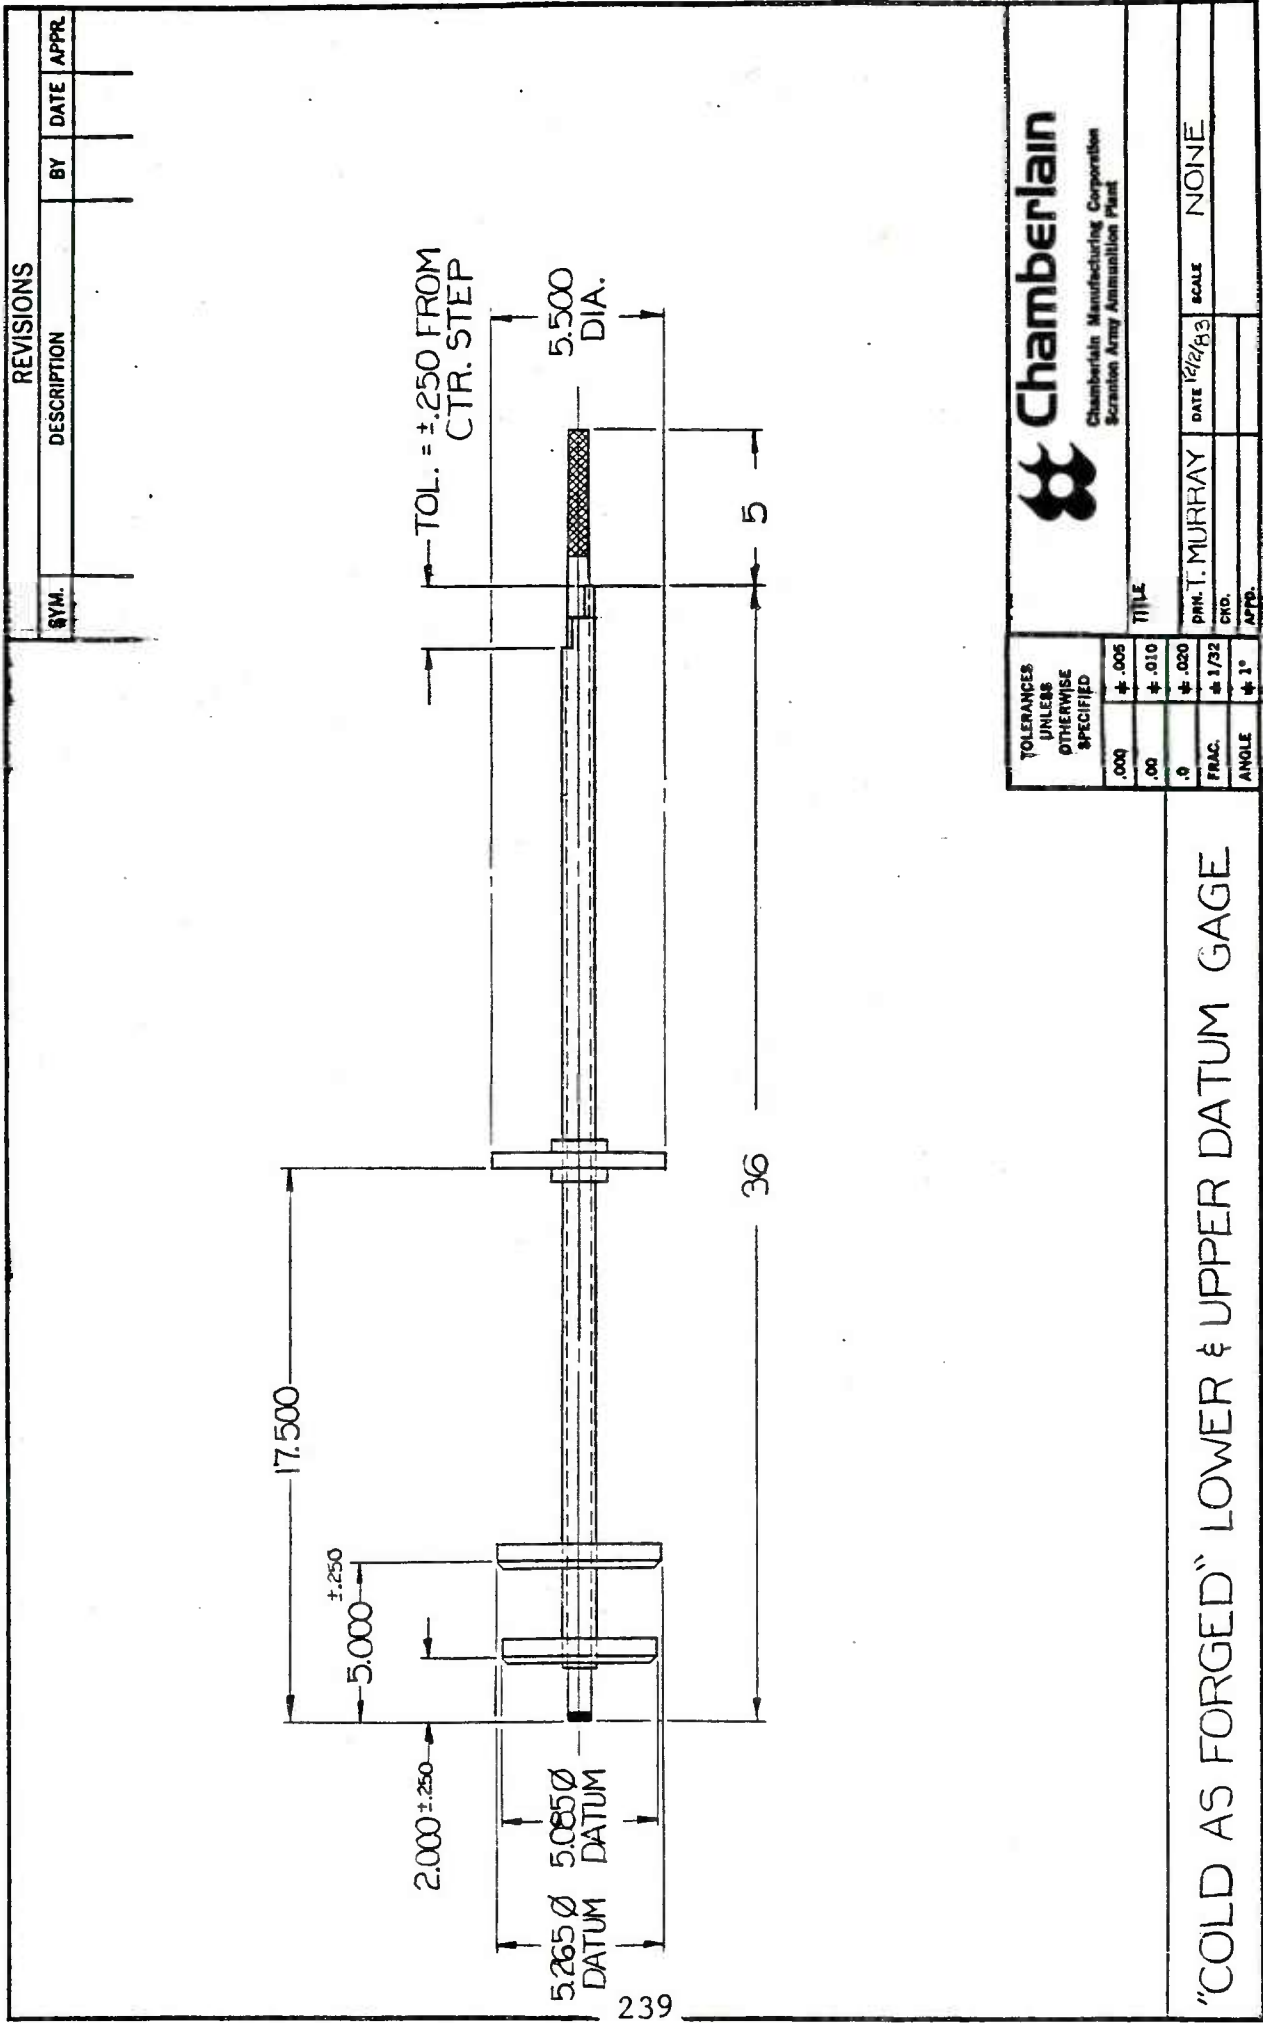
Datum gage utilized for the inspection of the "cold" forgings.
